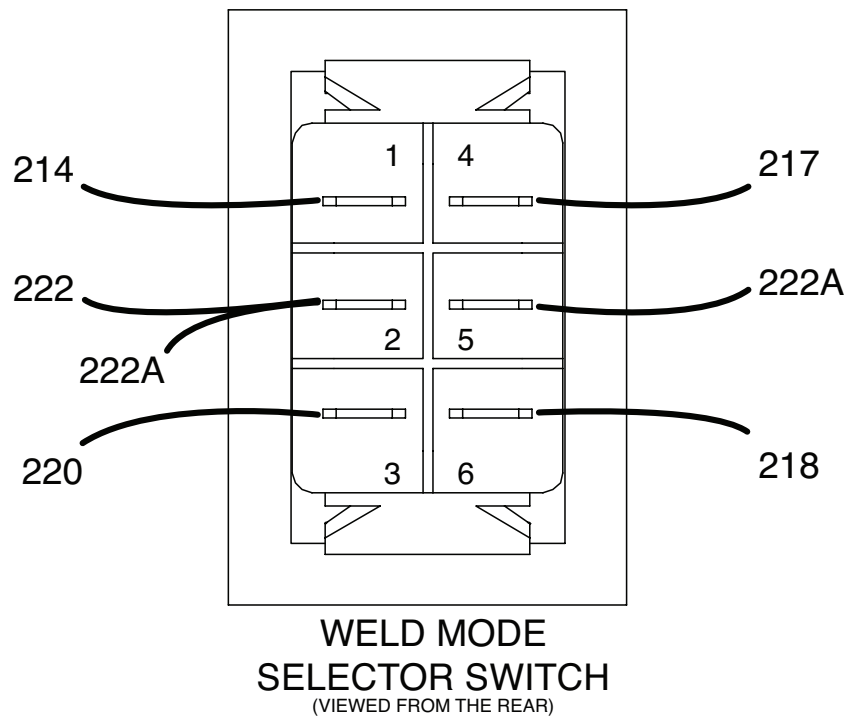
Weld mode selector switch lead and terminal locations
